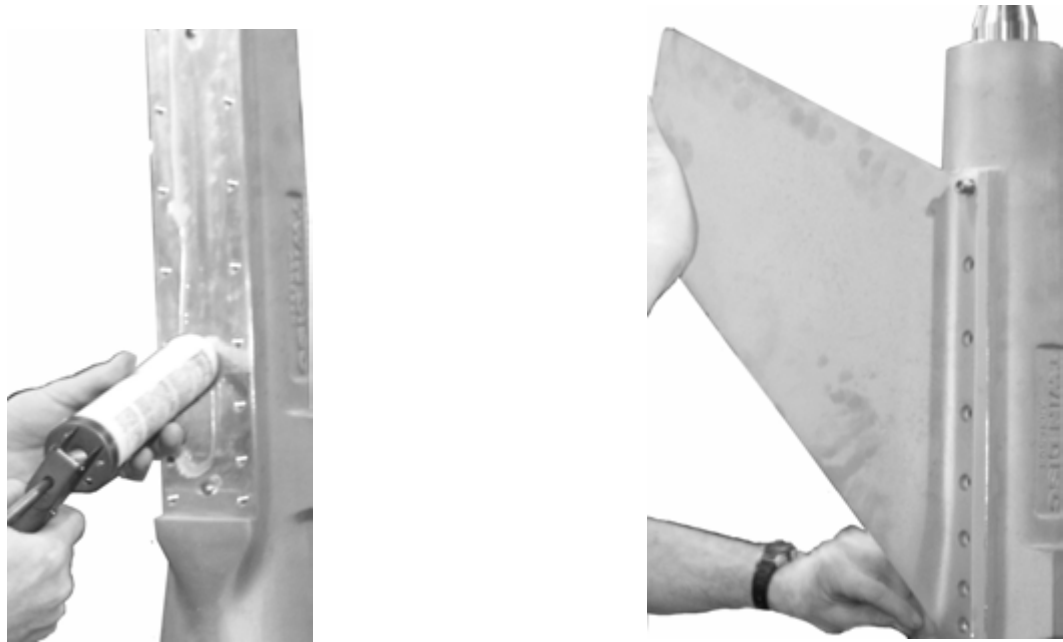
Apply Silicone to Thrust Tube Surface (left), Put Pin In Place, and Install Bolts (right)
